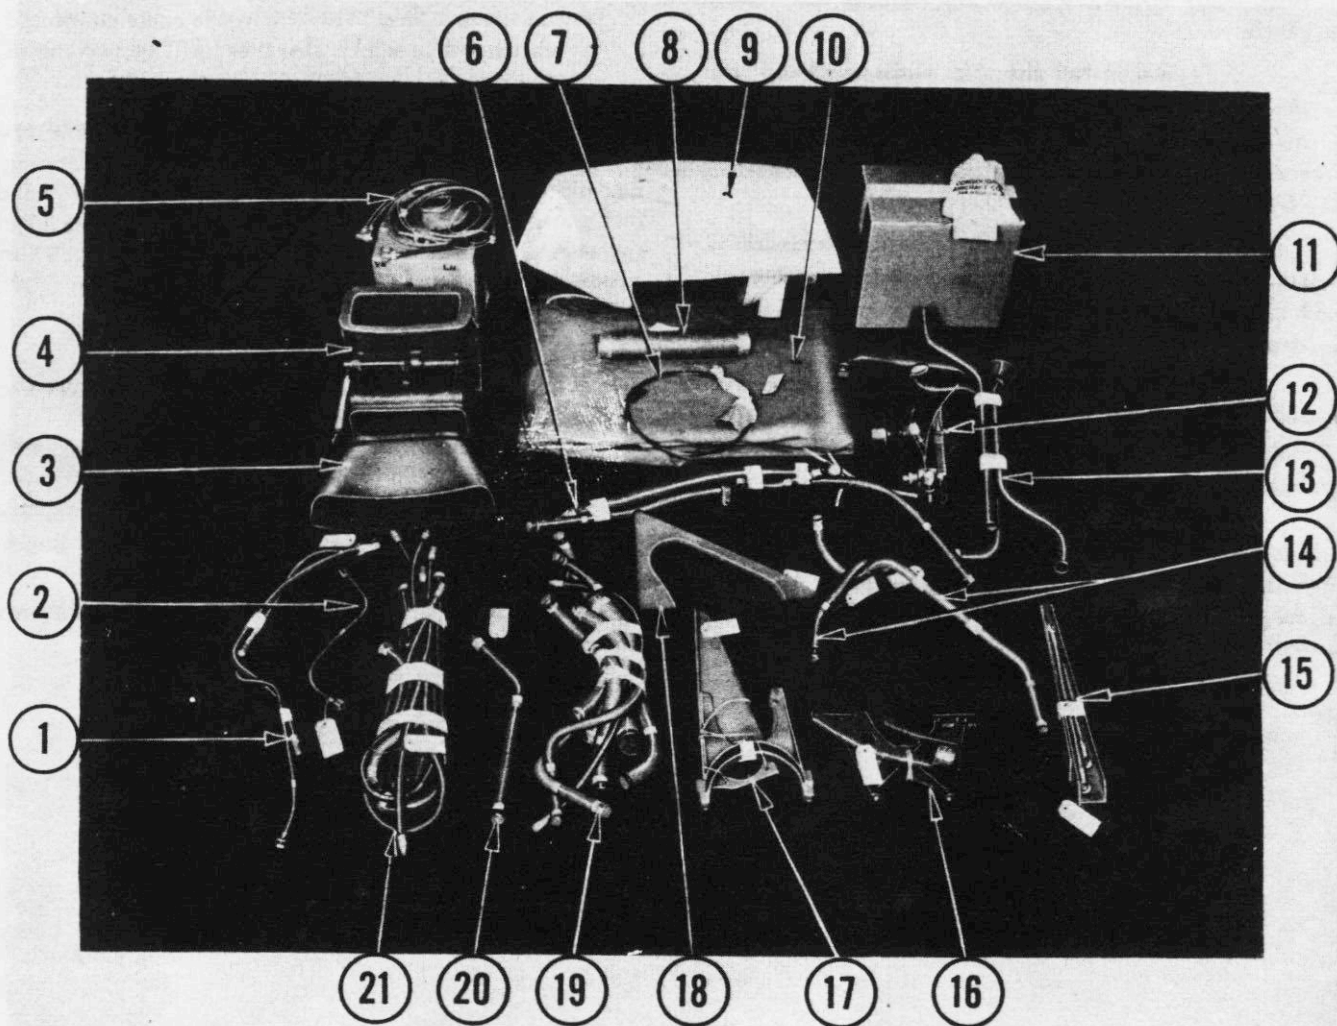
Quick Engine Change Unit—Parts and Installation Units
